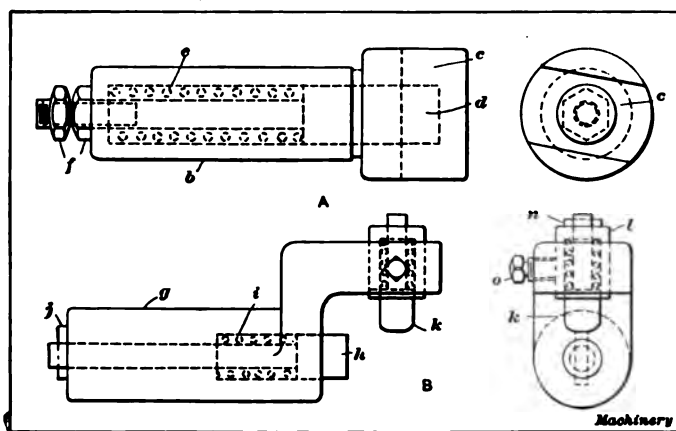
Standard Chuck-closer, and Device for Locating Work on the Holder shown in Fig. 27
